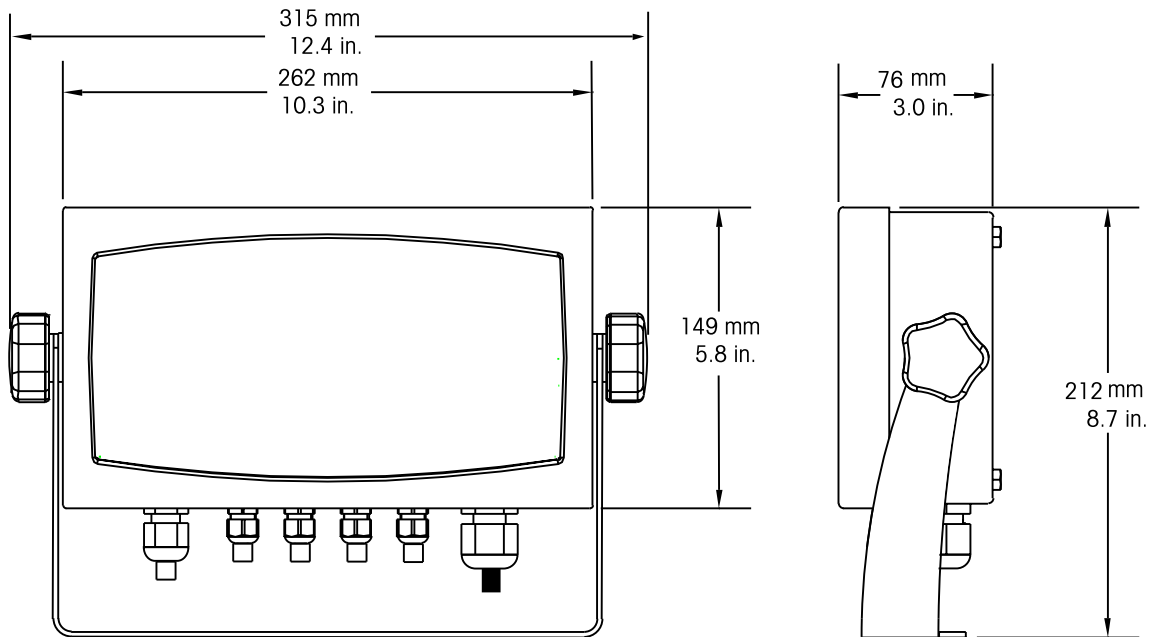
T51XW Indicator Overall Dimensions with Mounting Bracket.
